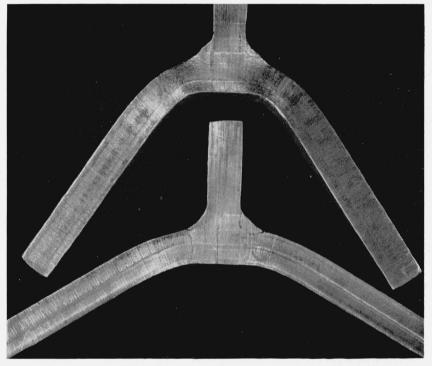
Cast and welded fillets tested in T-bend jig.
